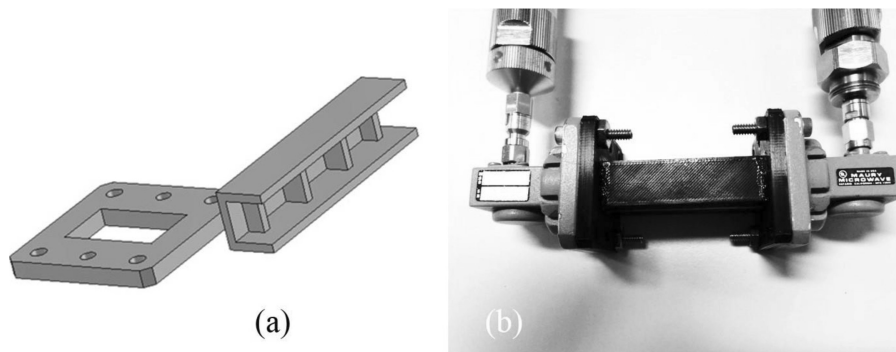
(a) Band-pass filter CAD layout and (b) printed structure ready to be measured.
